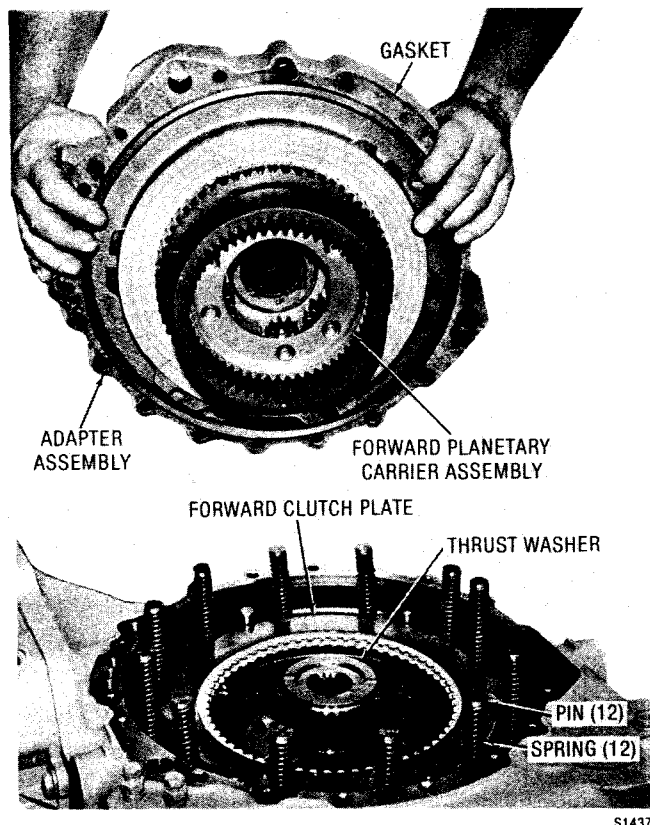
Removing adapter assembly and attached parts (TRT 2221-3, 2421-3 with overdrive)
